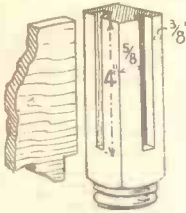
The grooves in the legs to hold the tapering side pieces.
